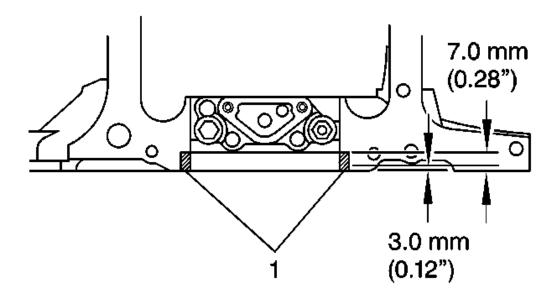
Applying Sealer To Both Sides Of Crankshaft Rear Man Bearing Cap Courtesy of GENERAL MOTORS CORP.
